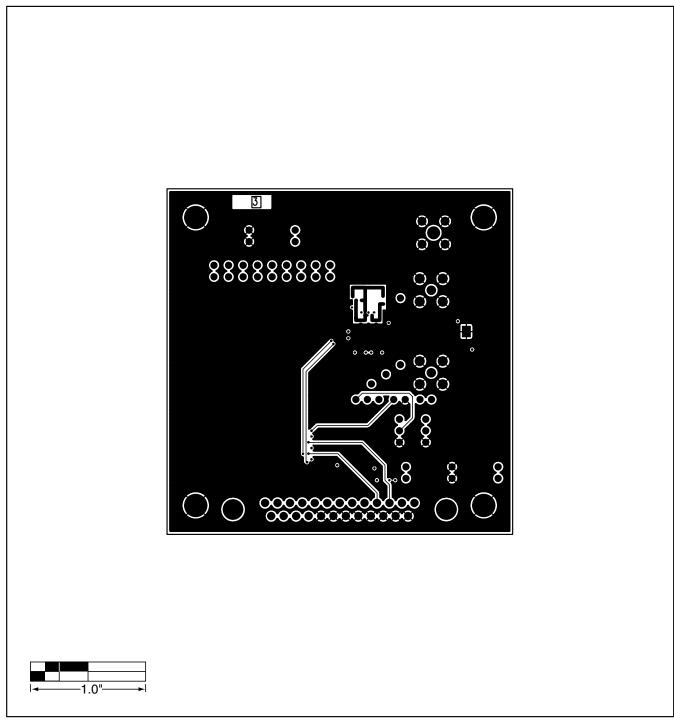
MAX2160 EV Kit PC Board Layout—Inner Layer 3
